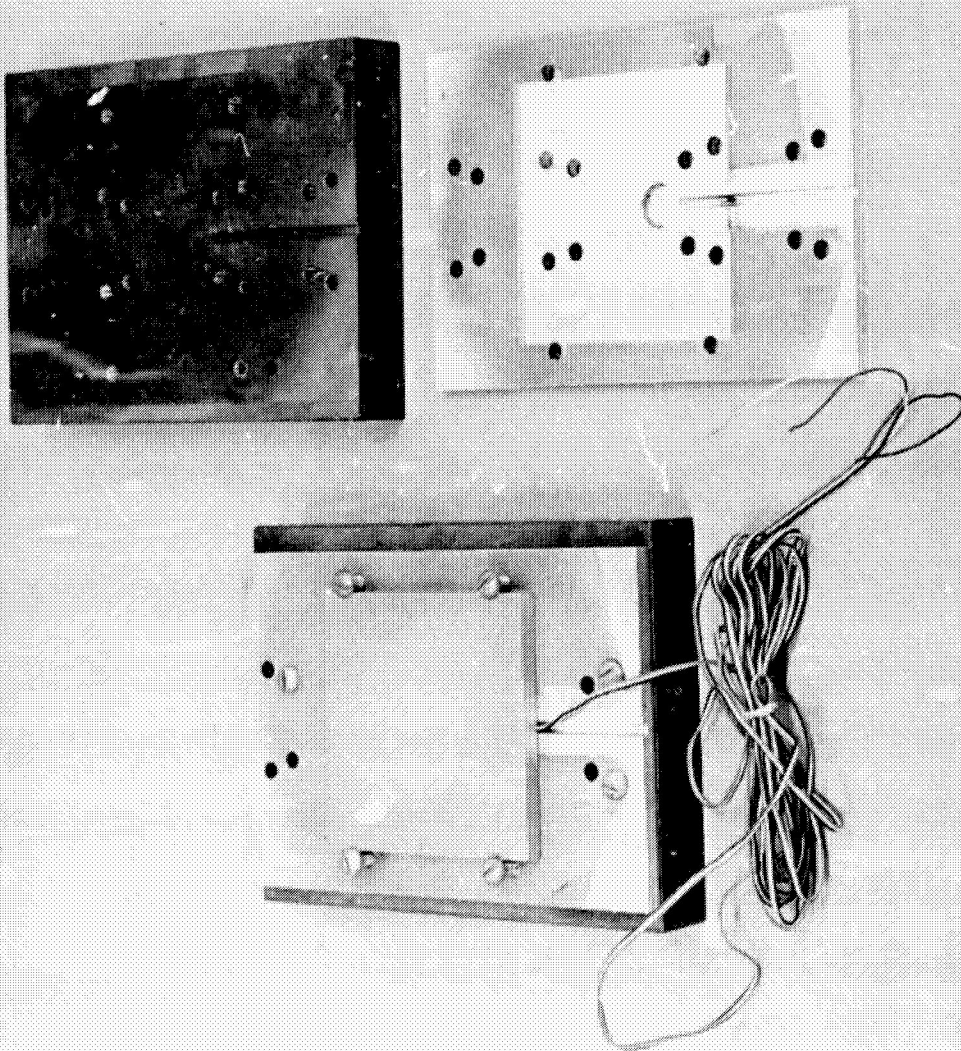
PEENING SPECIMEN HOLDER WITH SPECIMEN AND DISASSEMBLED
